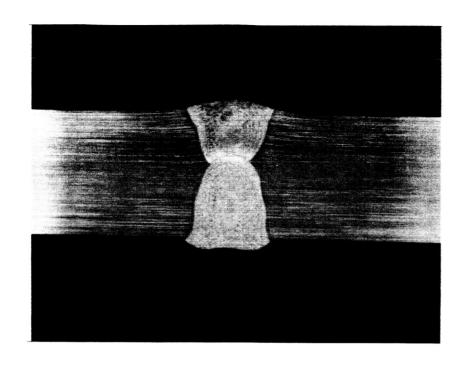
TYPICAL CROSS-SECTION AND JOINT PREPARATION FOR 0.50-INCH TIG SQUARE BUTT WELDMENTS
